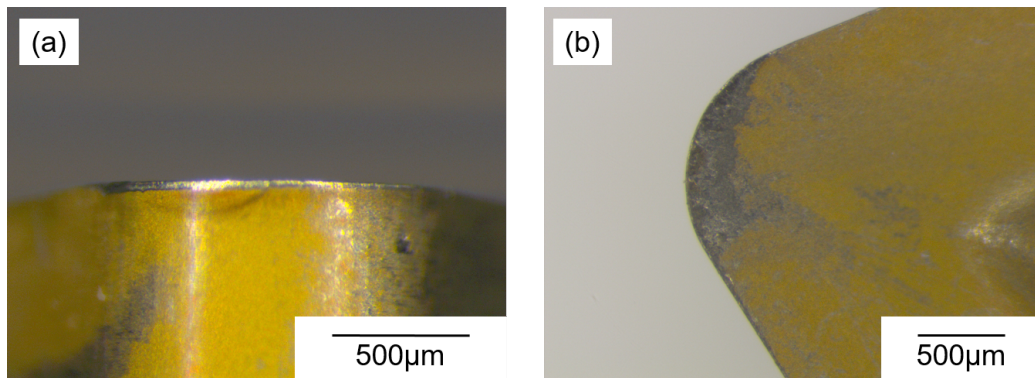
Example tool wear produced during face turning of face 3 of billet 4_1. The tool shown was used during the 3rd repeat of face 3. The tool shown is representative of all passes performed on face 3.
